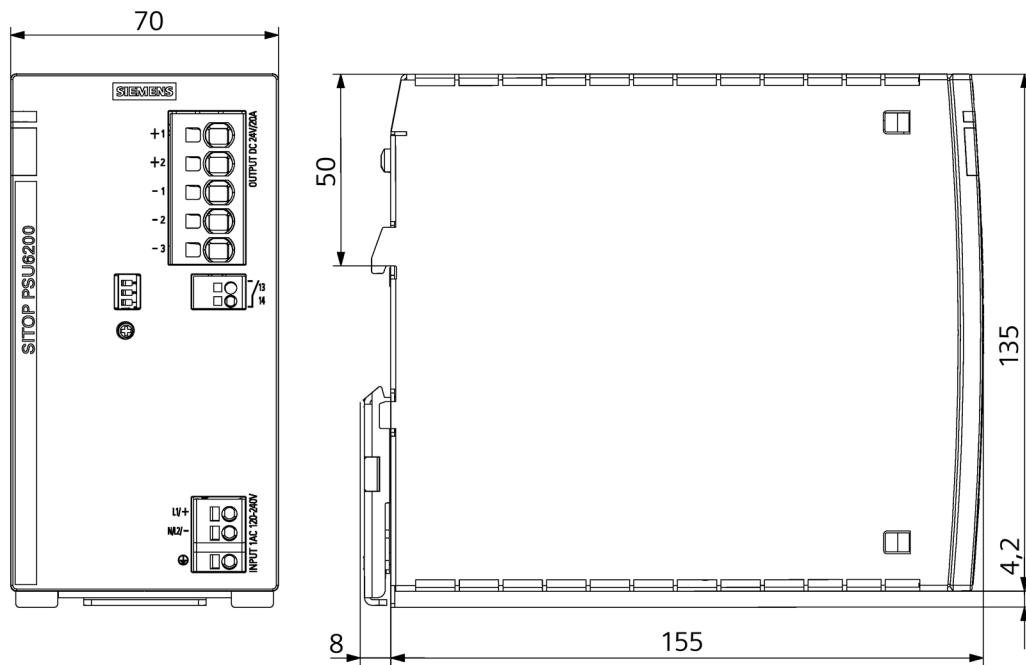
Dimension drawing 6EP3336-7SB00-3AX0, 6EP3346-7SB00-3AX0 and 6EP3336-7SC00-3AX0
